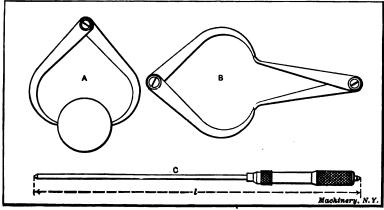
Setting Outside Calipers—Transferring Measurement to Inside Calipers—Micrometer Gage
